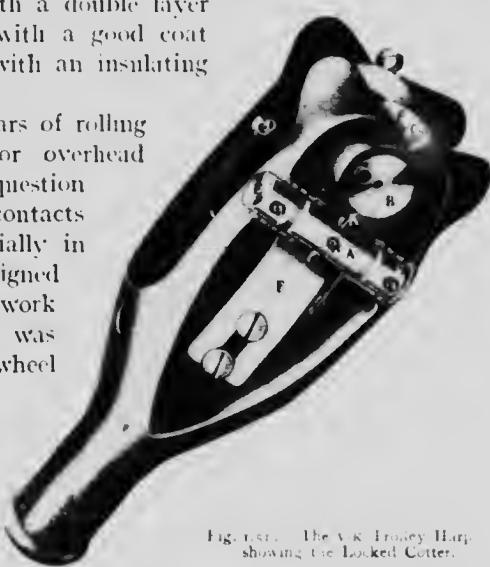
The V.K. Trolley Harp showing the Locked Cutter.
